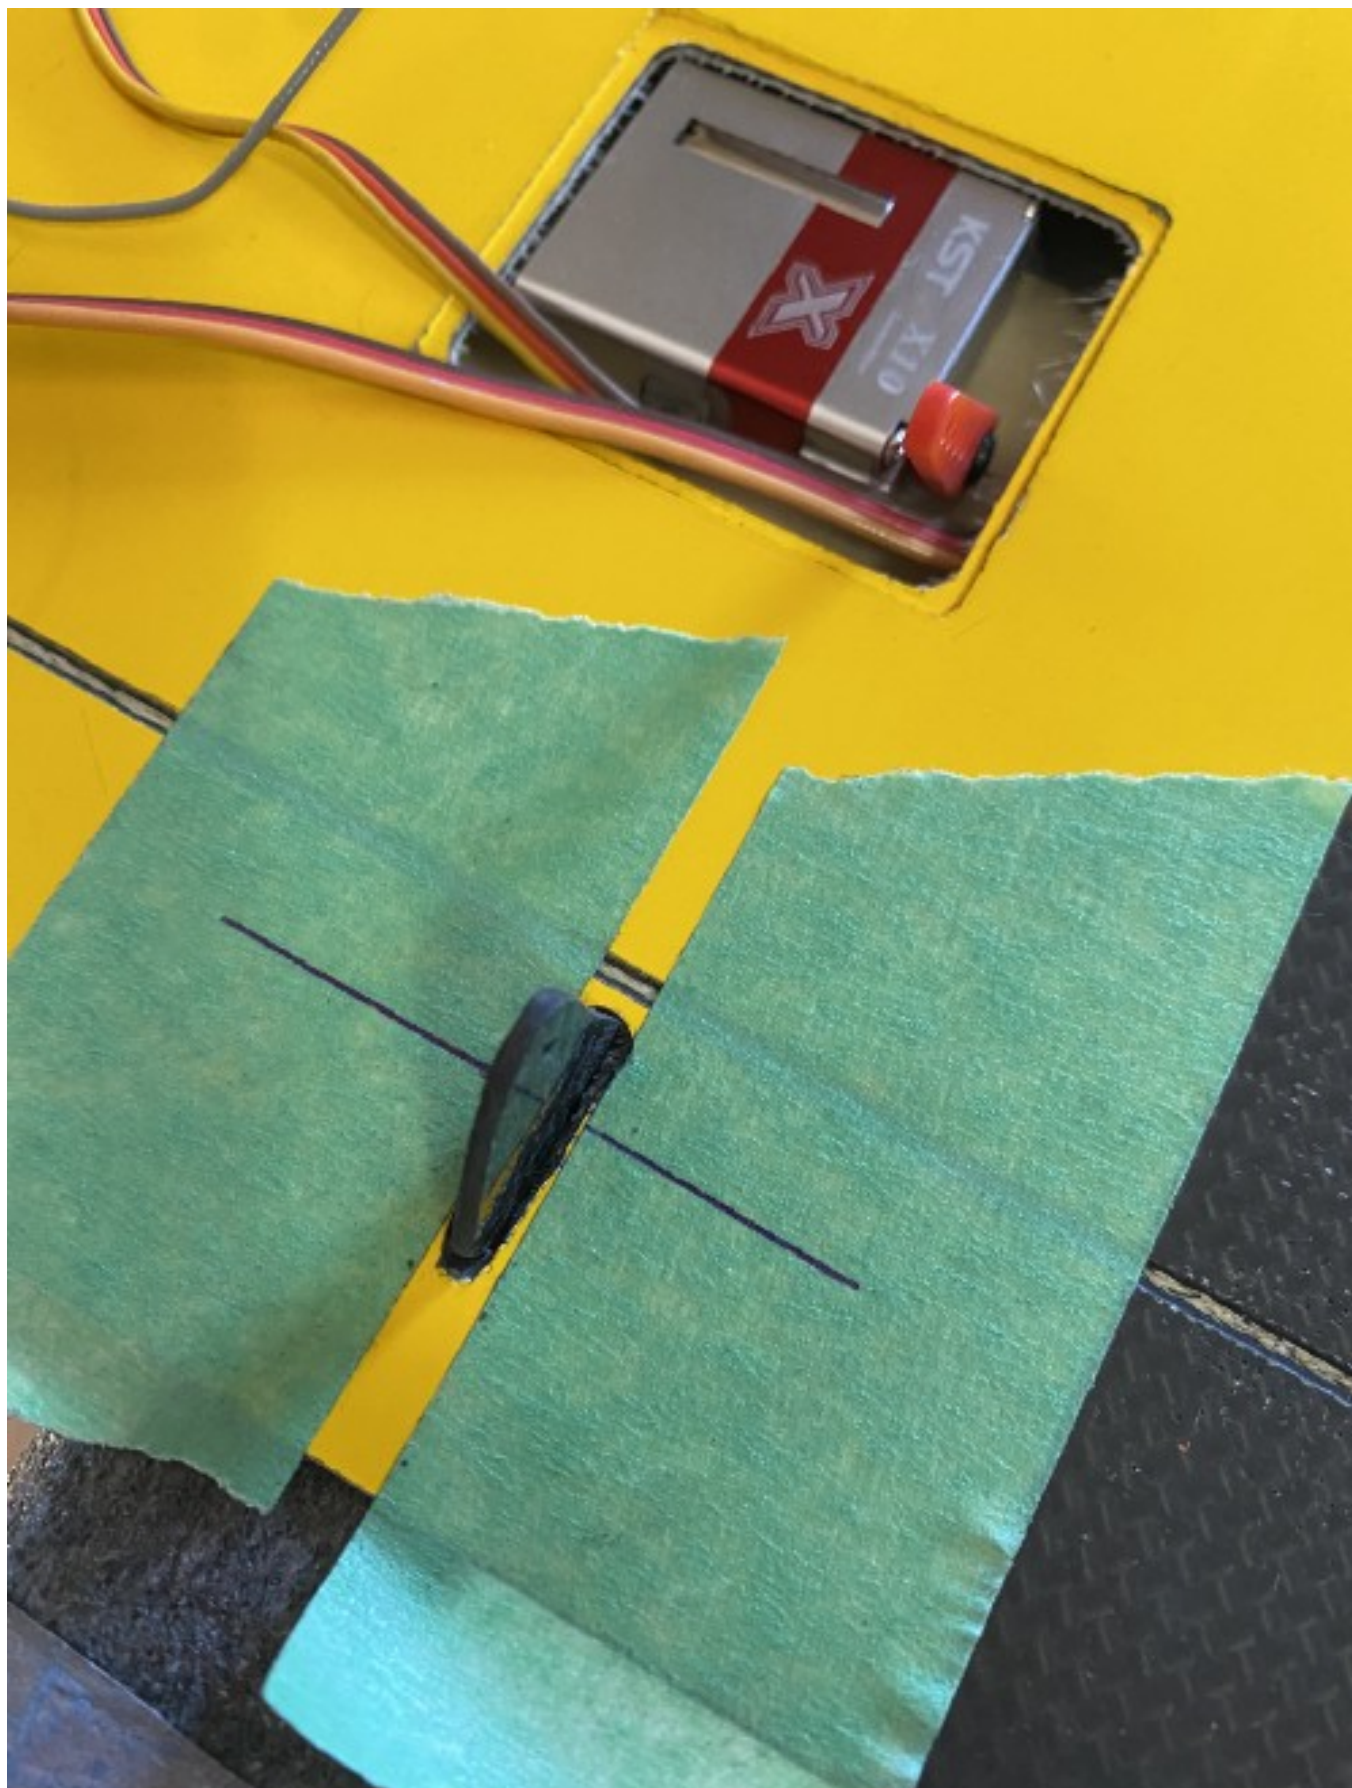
Control horn put in place just before potting in place with JB Kwik-Weld. (image: Michael Berends)
